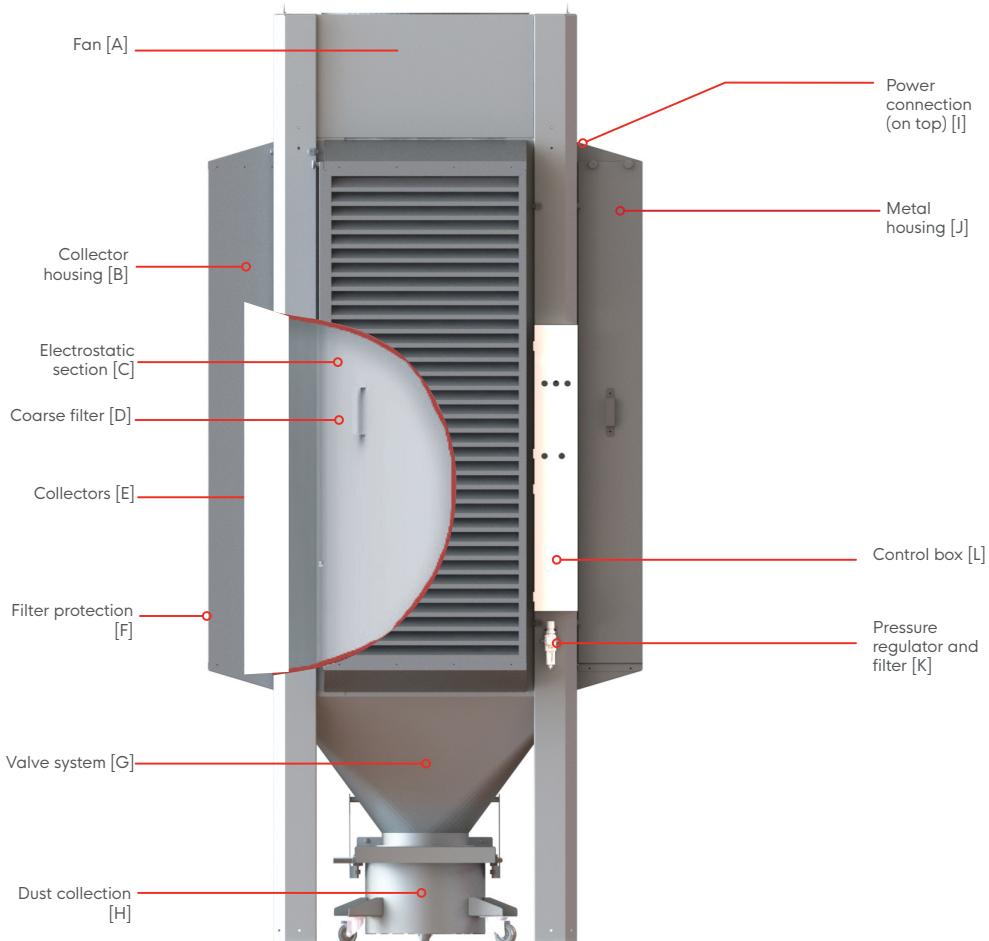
Main parts E-PURE ASPRA P10000-4C
